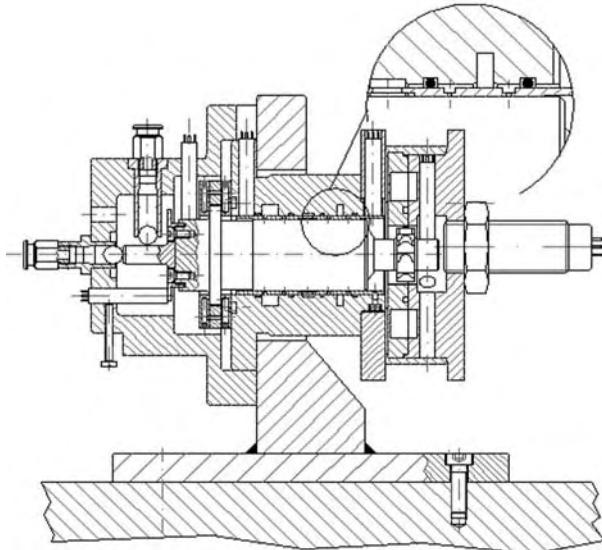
Sketch of spindle with bushing mounted floating on O-rings
